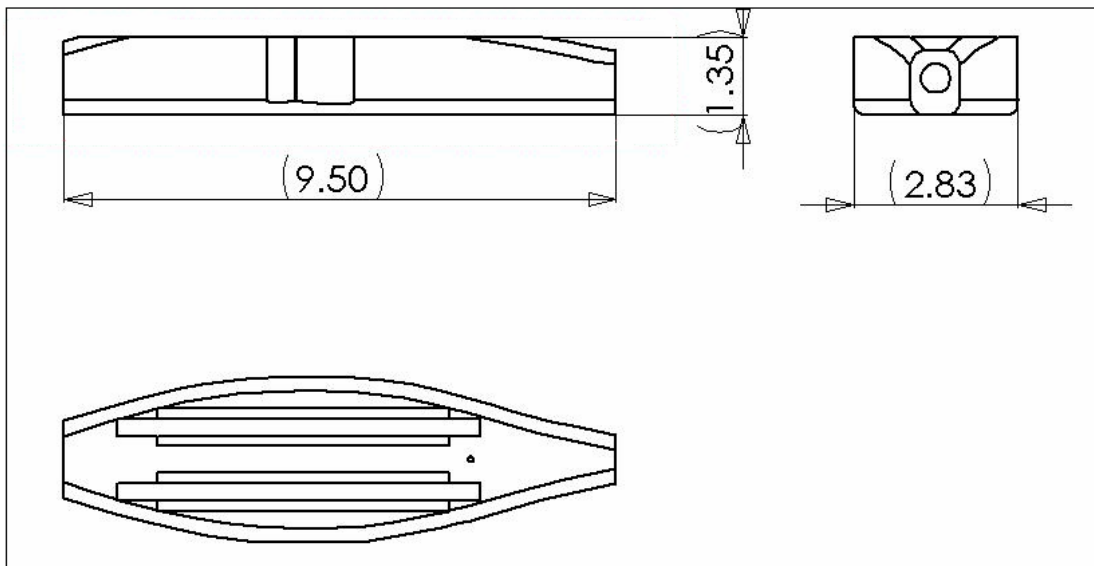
3 View Drawing of Fuselage Testbed (Bottom)
